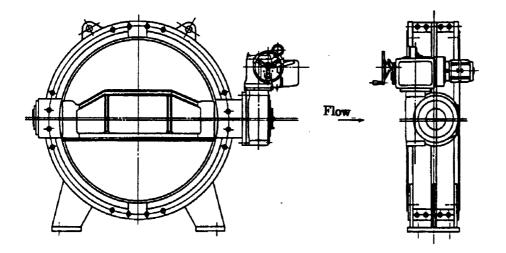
Bi-plane Valve Motor operating type(Typical)
